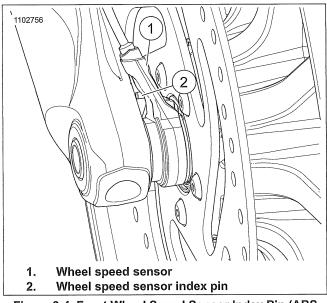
Front Wheel Speed Sensor Index Pin (ABS equipped)
